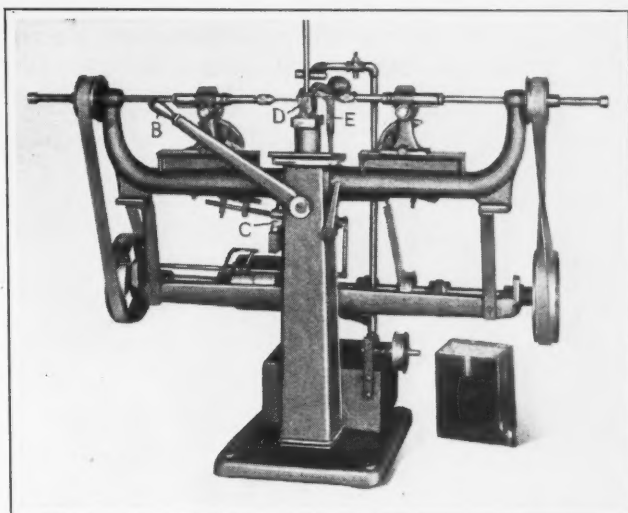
Reed Drilling Machine with Opposed Spindles for drilling Work from Opposite Sides
